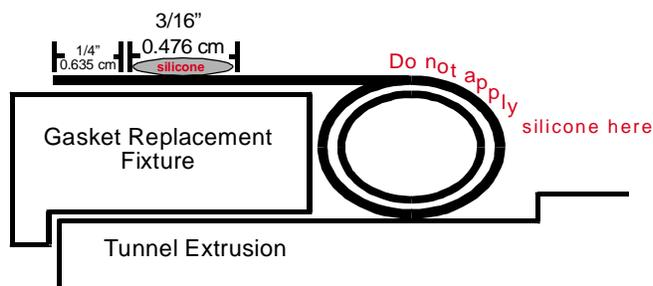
Cut-away View of Side of Gasket and Gasket Replacement Fixture
